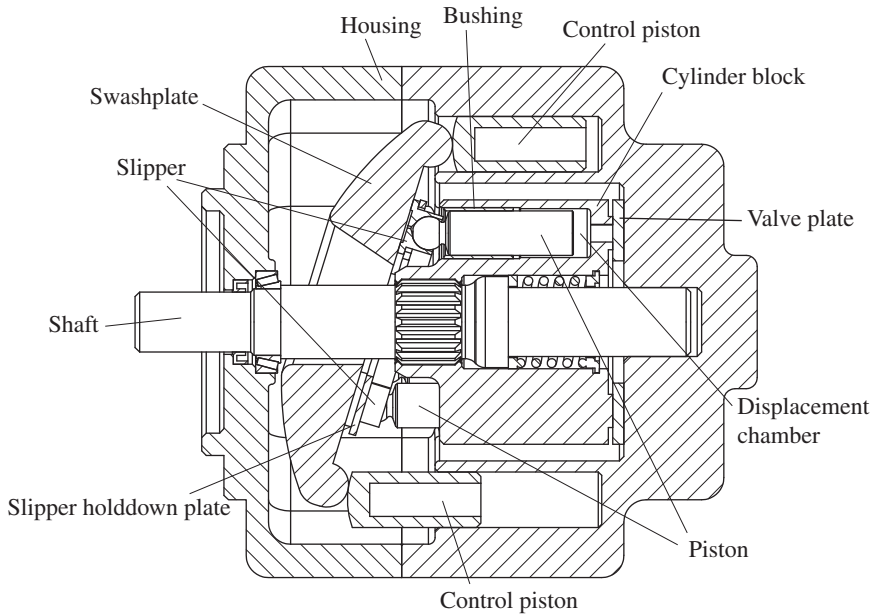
Swashplate-type axial piston machine vertical cross-section.
